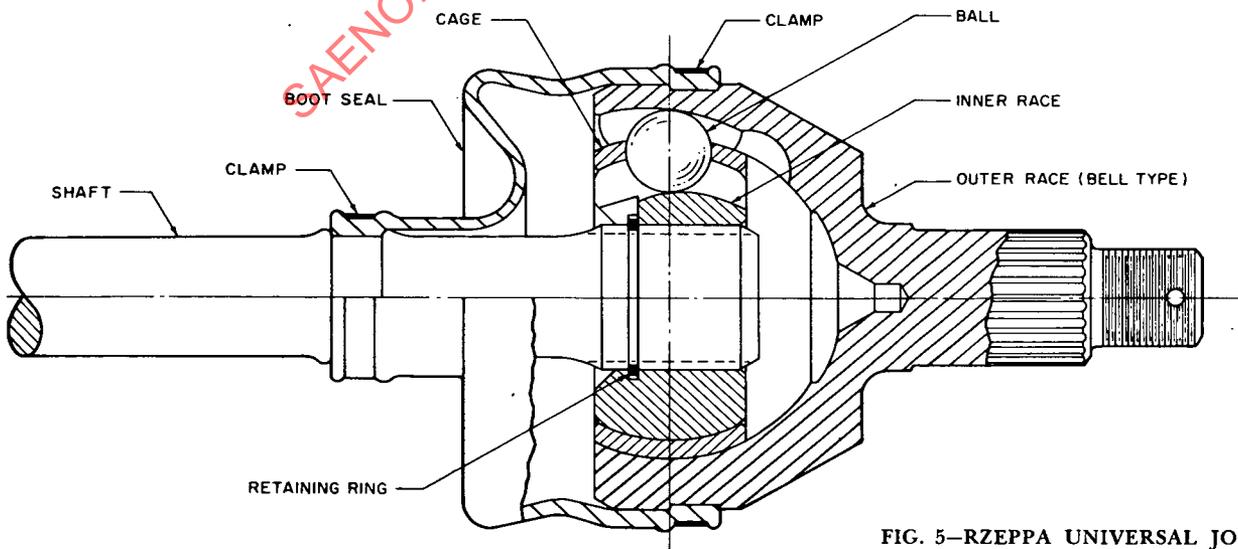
RZEPPA UNIVERSAL JOINT (BELL TYPE)
